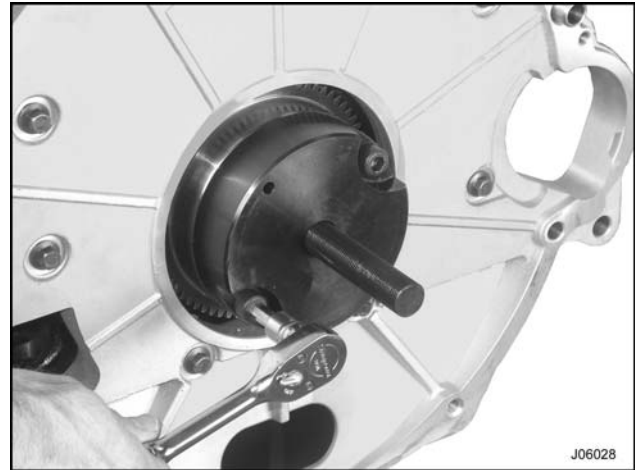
Rear Seal / Wear Sleeve Installer (CityStar™)
